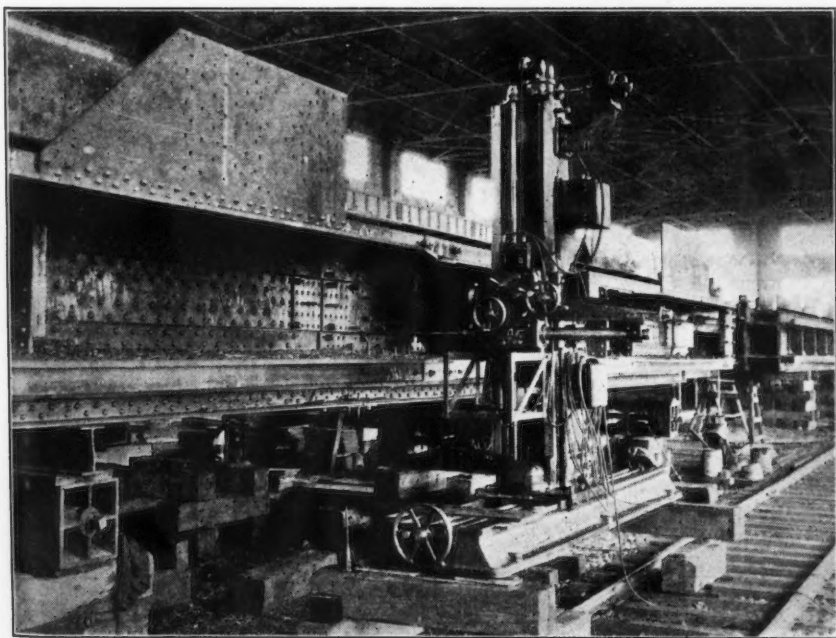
REAMING HORIZONTAL FIELD SPLICE OF COLUMN.
